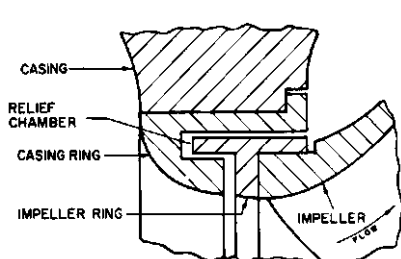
A single-labyrinth, intermeshing type. It is a double-ring construction with a nozzle-type casing ring.
